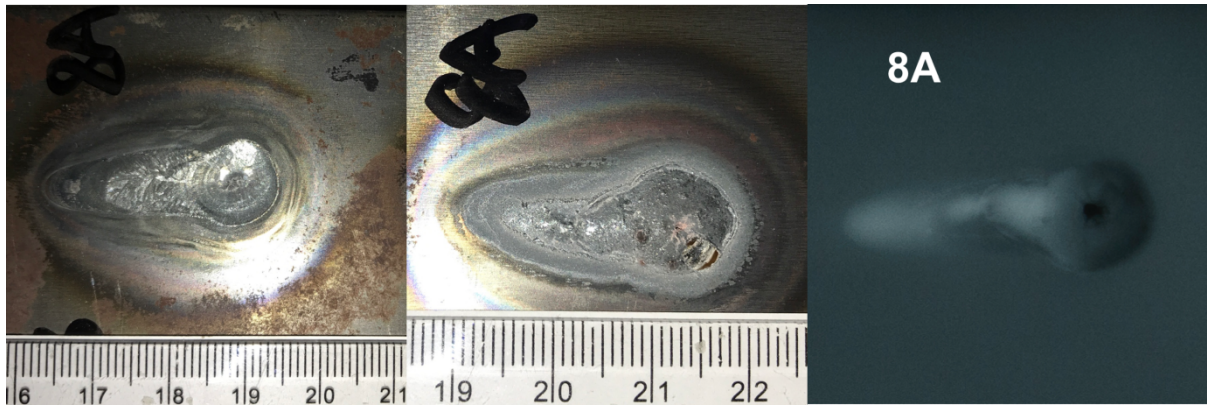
Photographs of weld cap/ root of trial 8A and radiographic inspection result.
